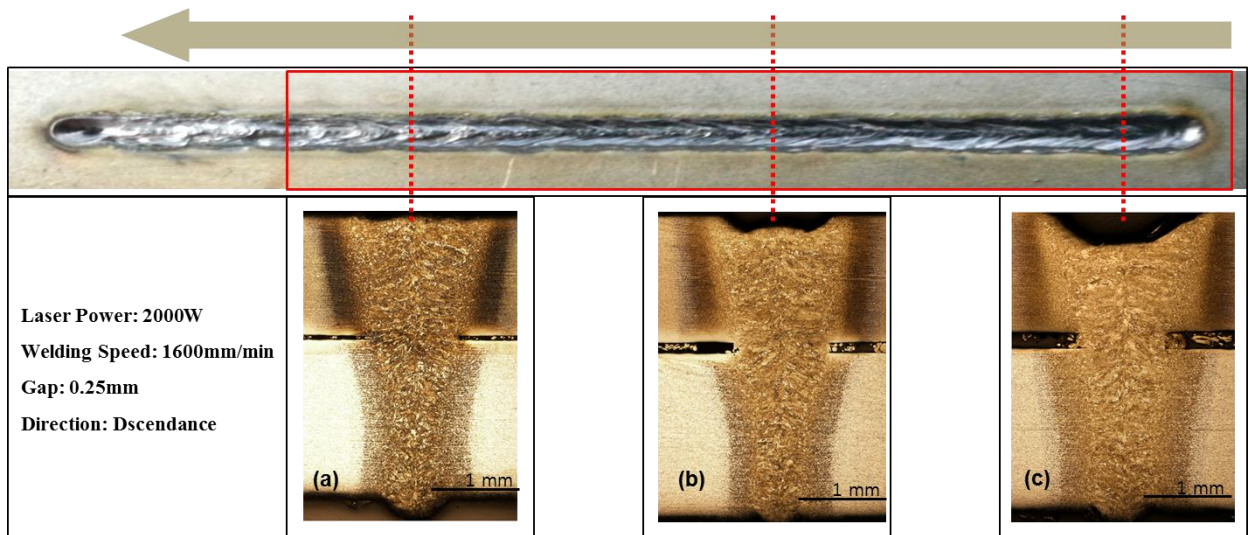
Laser Power: 2000W, Welding Speed: 1600mm/min, Gap: 0.25mm, Direction: Descendance
